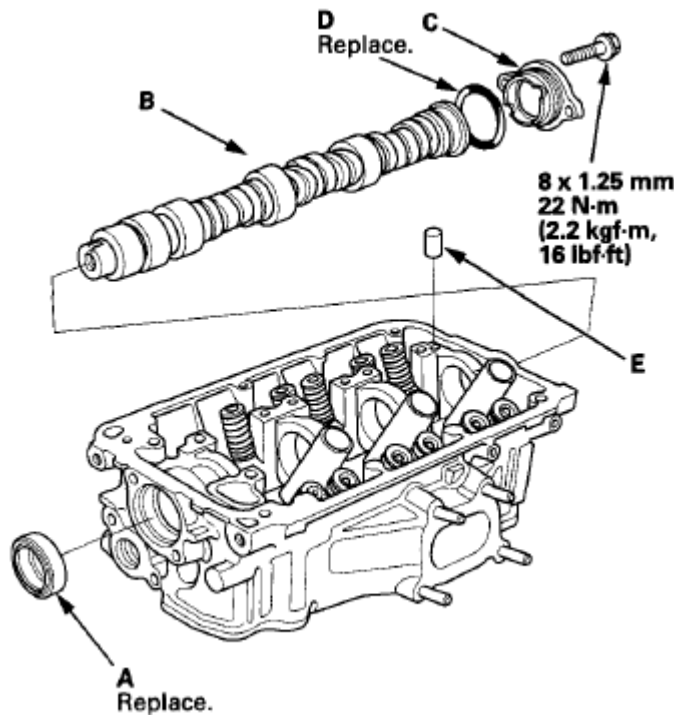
Identifying Camshaft Oil Seal With Torque Specifications
